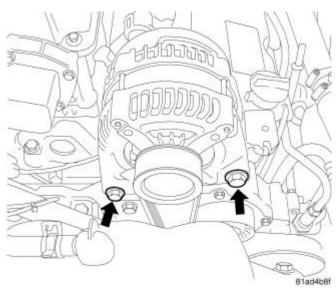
MOUNTING BOLTS Courtesy of CHRYSLER LLC
